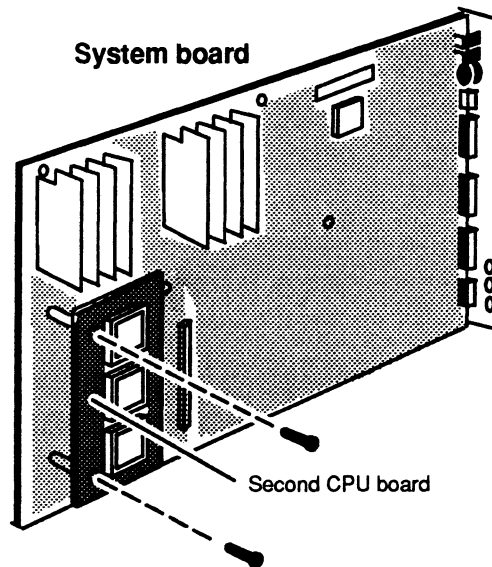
Removing the Screws Securing the Second CPU Board to the System Board
